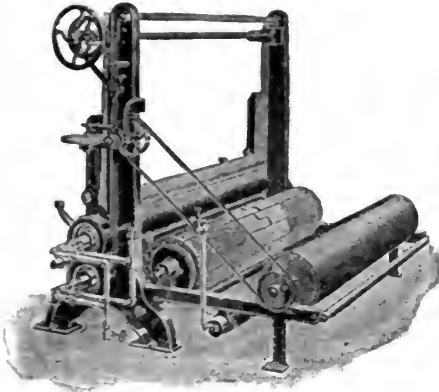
The Curtis & Marble Calender Rolling Machine with Adjustable Measuring Attachment.
